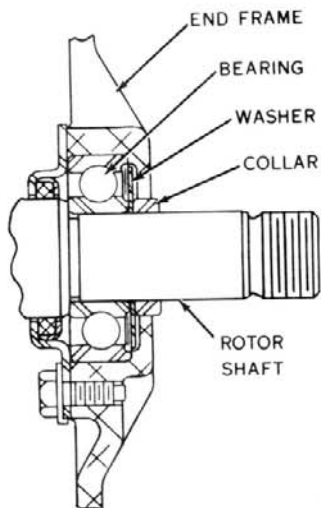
Drive end bearing assembly, early production (10-SI/116).
